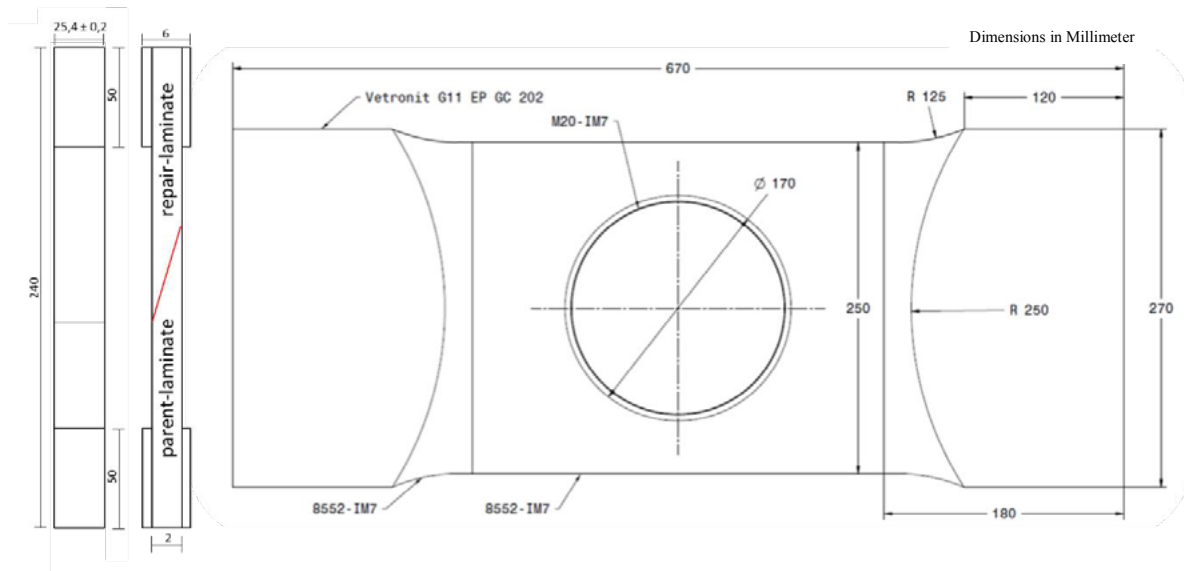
l. to r. sketch of specimen EN6066 top view, EN6066 side view and 2,5D top view
